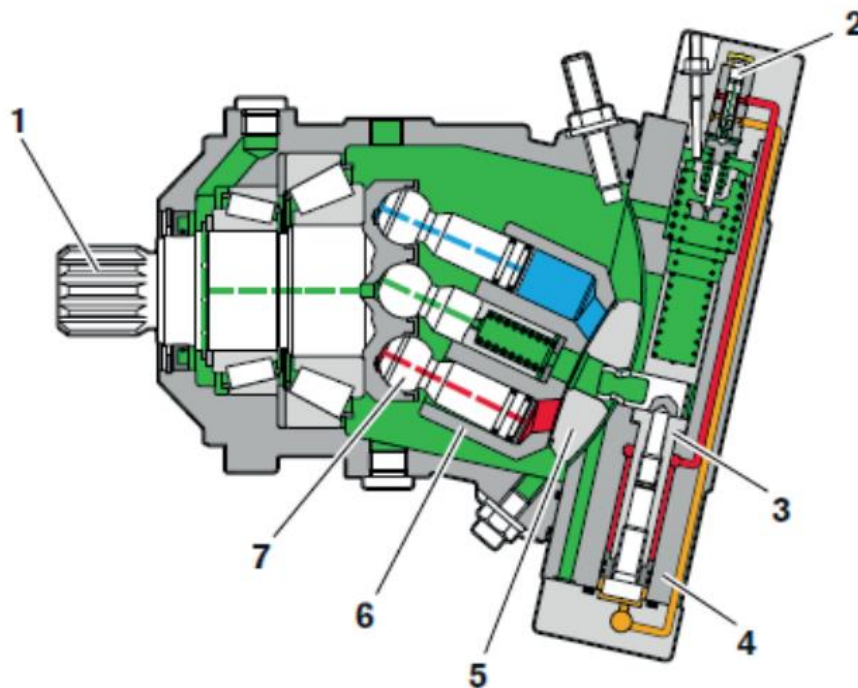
Cross-section of the A6VM variable displacement axial piston hydraulic motor by Bosch Rexroth
